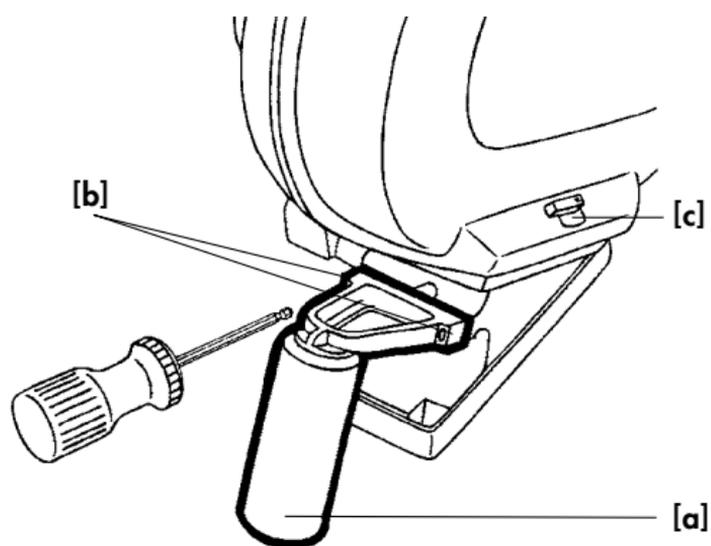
400/120 MAG. CARRYING HANDLE
